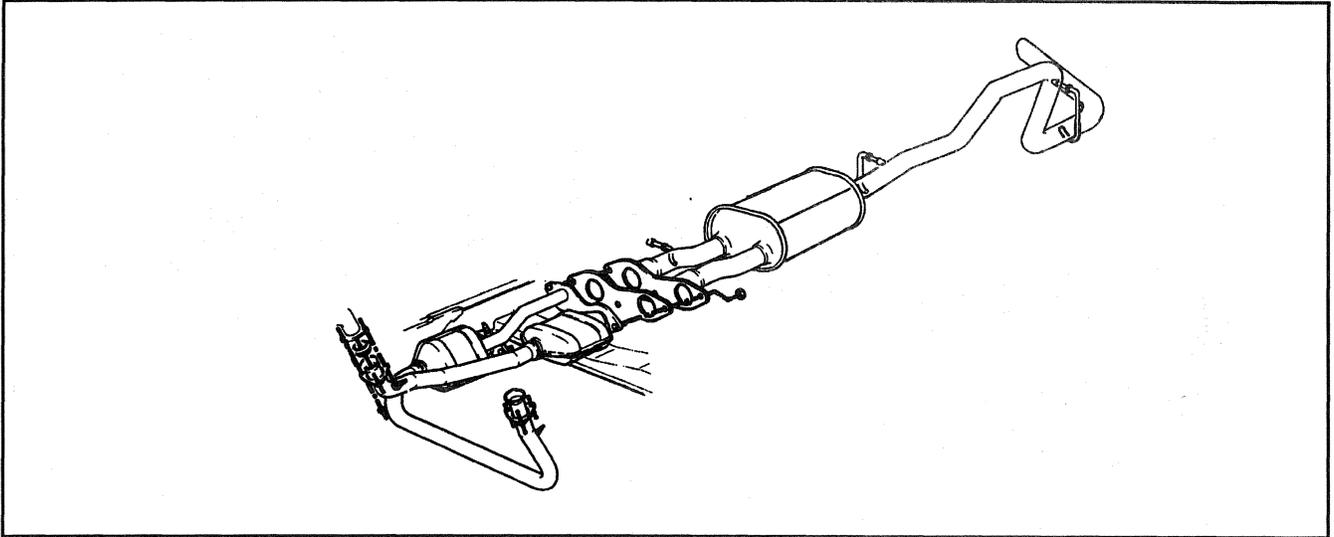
Exhaust System - C/K 1 Regular Cab Short Box w/5.0L Engine
